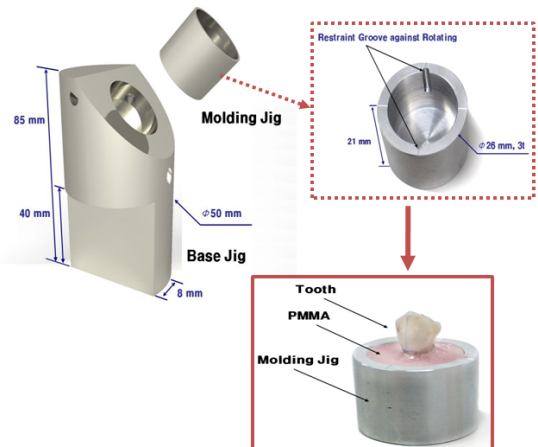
Base and Molding Jigs for Fracture Test of Korean Teeth
